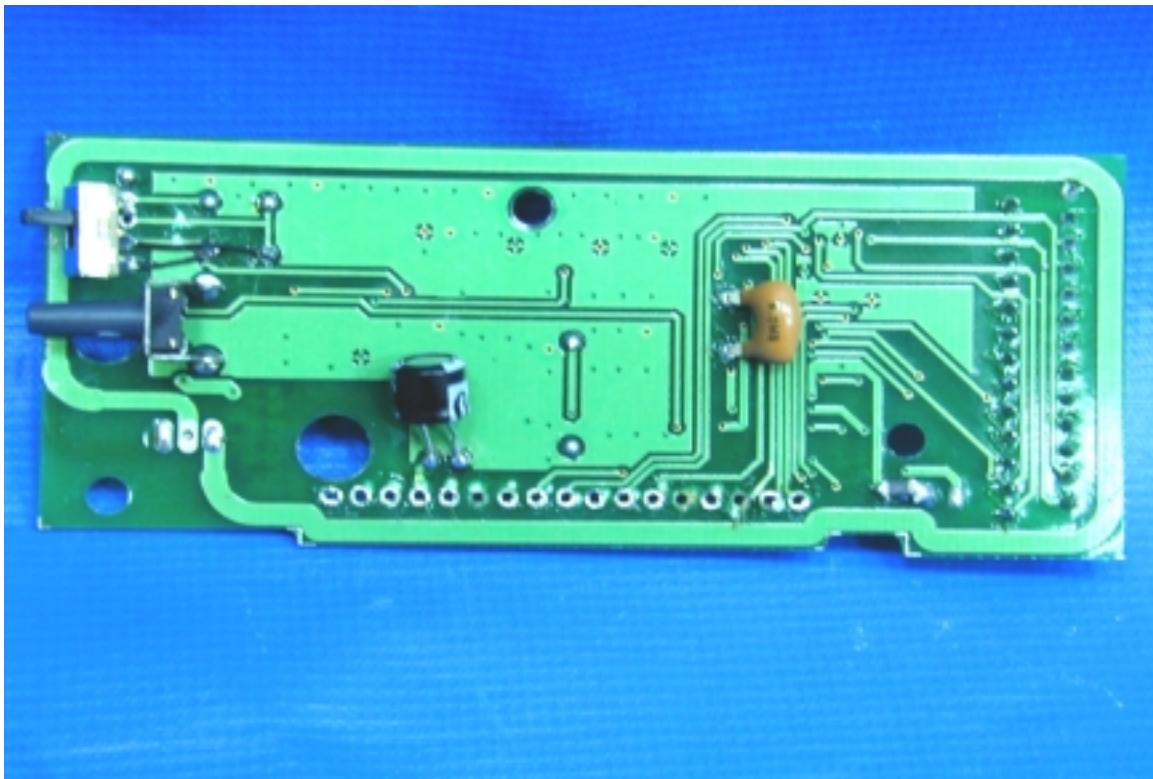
EUT (TX) SOLDERING SIDE VIEW
